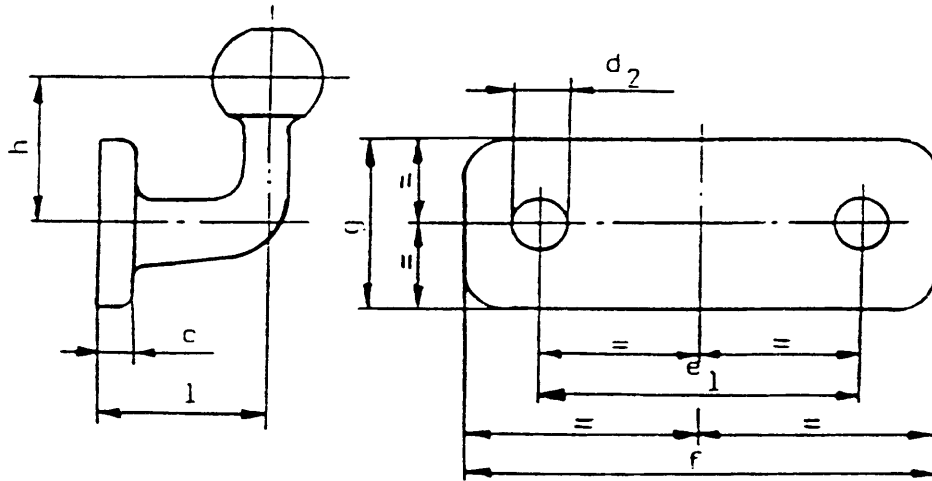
Dimensions of standard ball couplings and flange type towing brackets of Class A50-1 (mm), see Table 1
